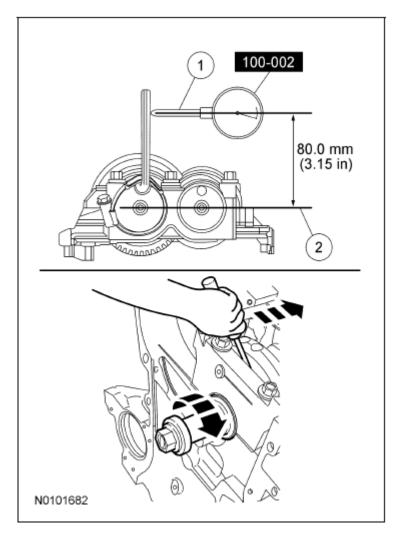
Measuring Gear Backlash Using Dial Indicator Gauge Courtesy of FORD MOTOR CO.
